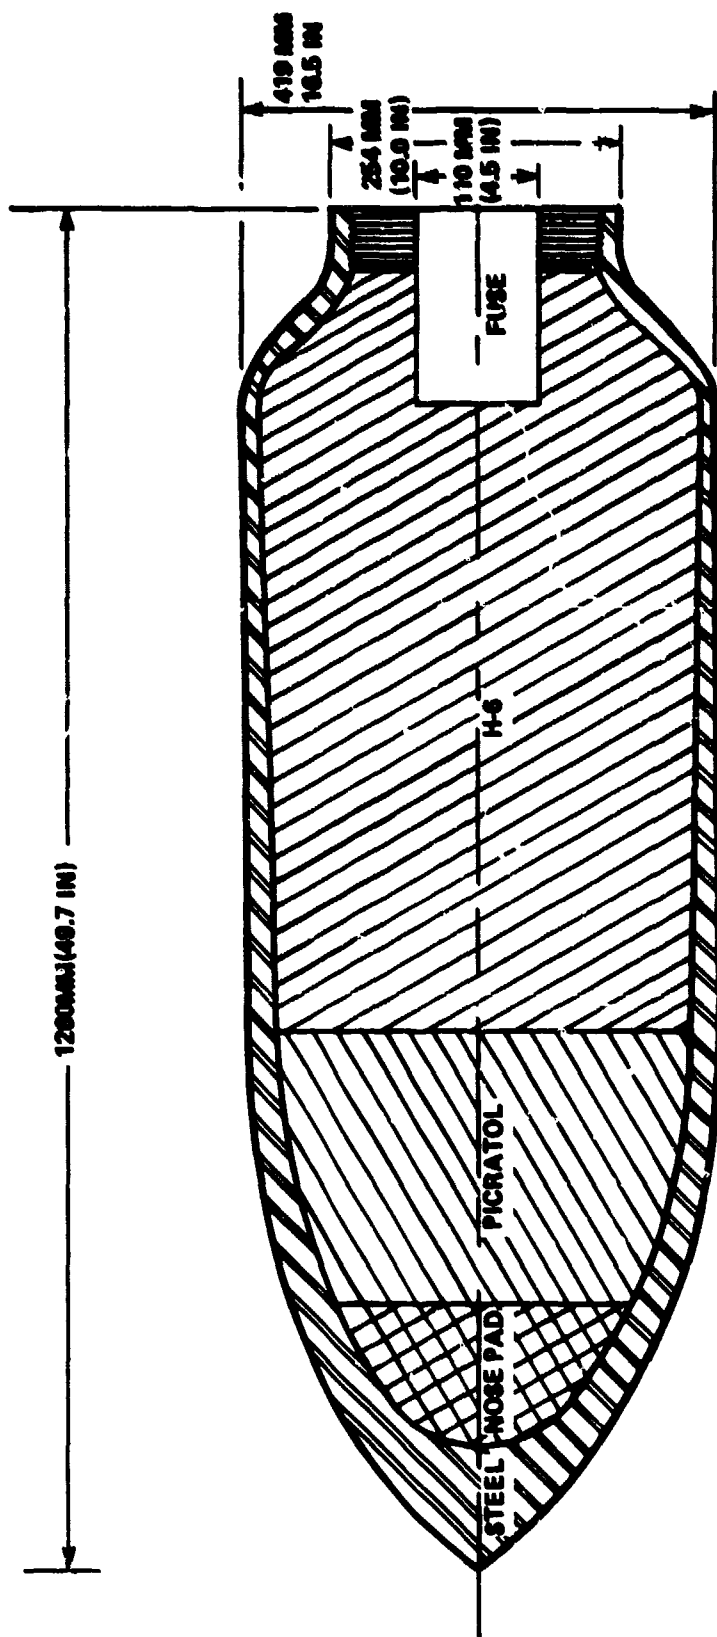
WDU-25/B WARHEAD ASSEMBLY
